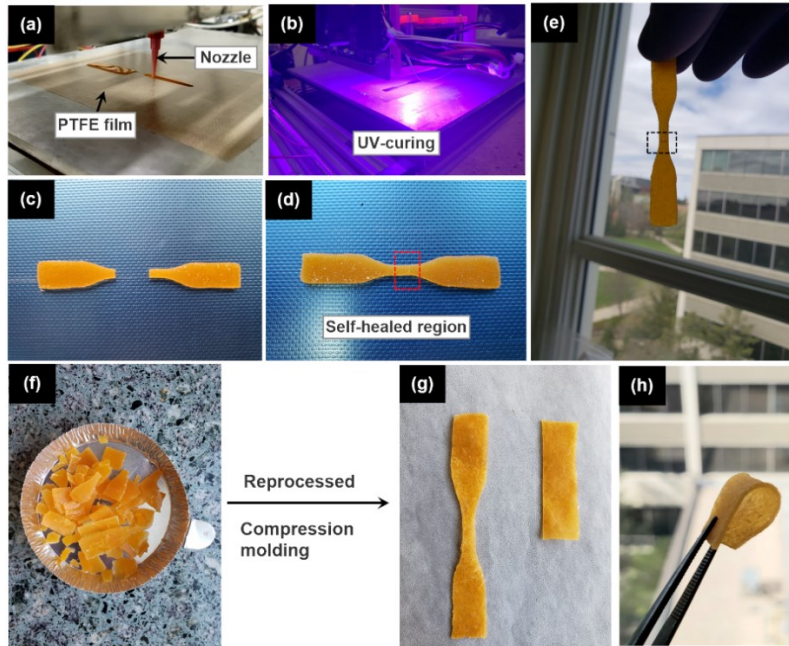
Inkjet 3D printing of reprocessable self-healing elastomer. (a) Inkjet 3D printing setup. (b) Demonstration of UV-curing after deposition. Photographs of (c) 3D printed dogbone, which is cut in half for a self-healing experiment, (d) and (e) after self-healing, (f) pieces that were used for reprocessing, (g) and (h) after reprocessing by compression molding.
